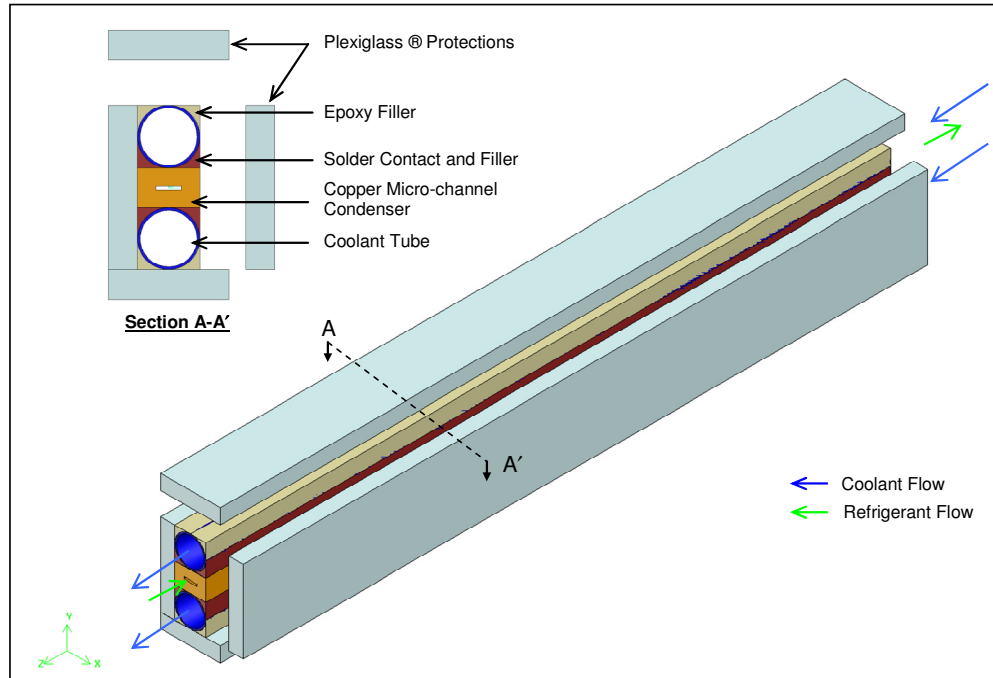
A semi-exploded sketch of a proposed improved test section
